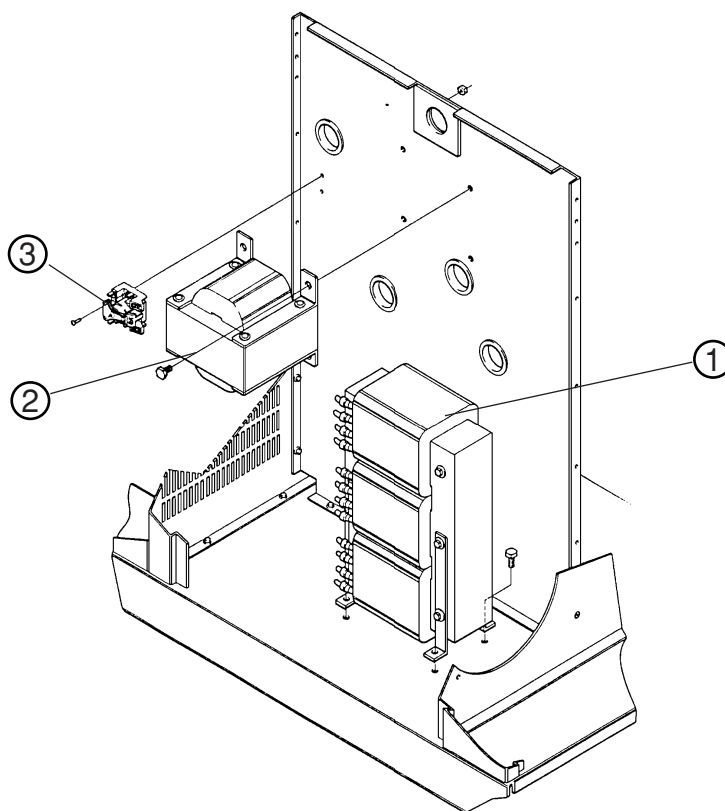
Power Supply – Center Panel and Bottom, Left Side
